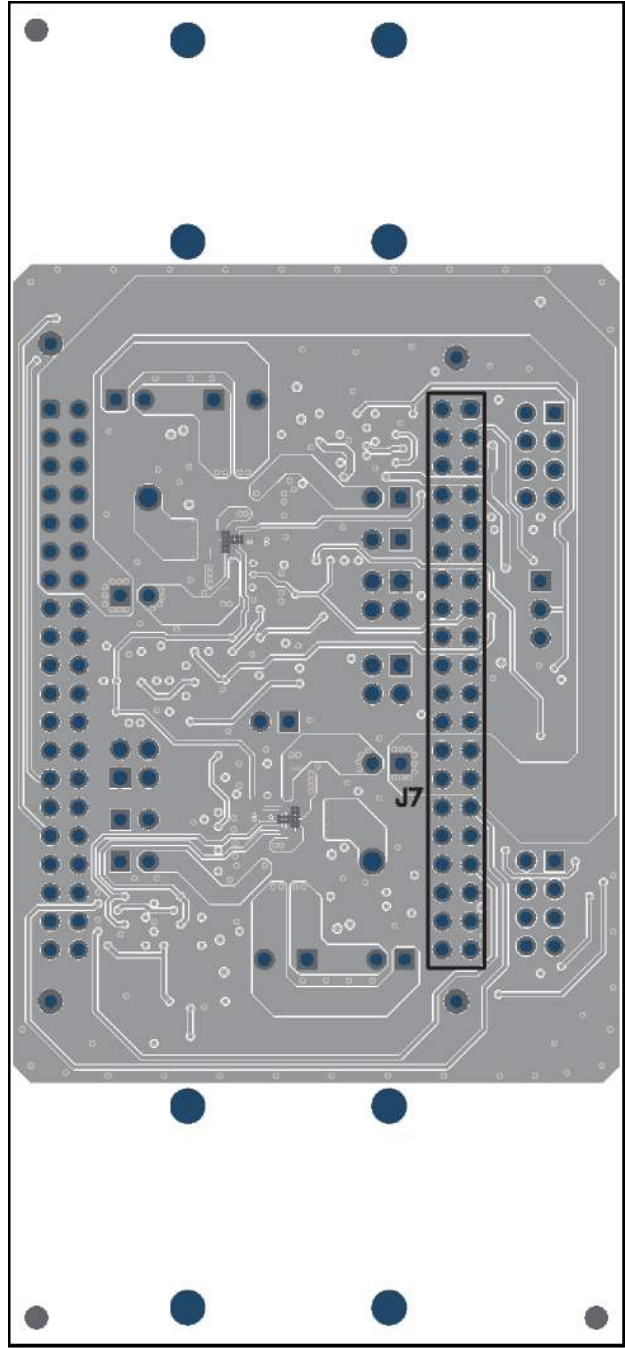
TAS2563YBGEVM-DC Bottom Assembly
